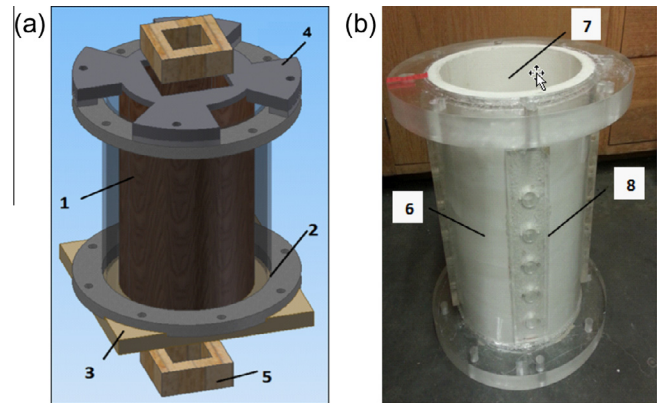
(a) Assembly of mold for casting the gypsum lining and (b) fabricated test section (1. Inner Core, 2 & 6. Outer Acrylic Casing, 3. Base Plate, 4. End Cap, 5. Wooden Insert, 7. Gypsum Liner, 8. Acrylic Strip for UT sensors).
